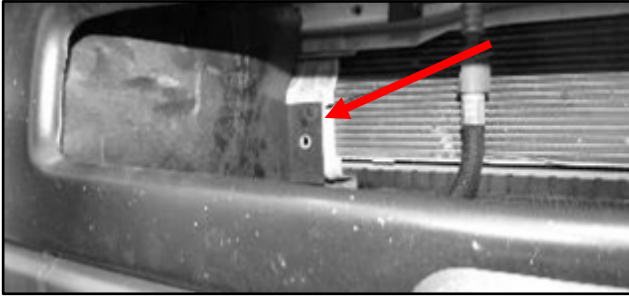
Remove the skid plate by removing the DS bolt that mount the skid plate to the frame
